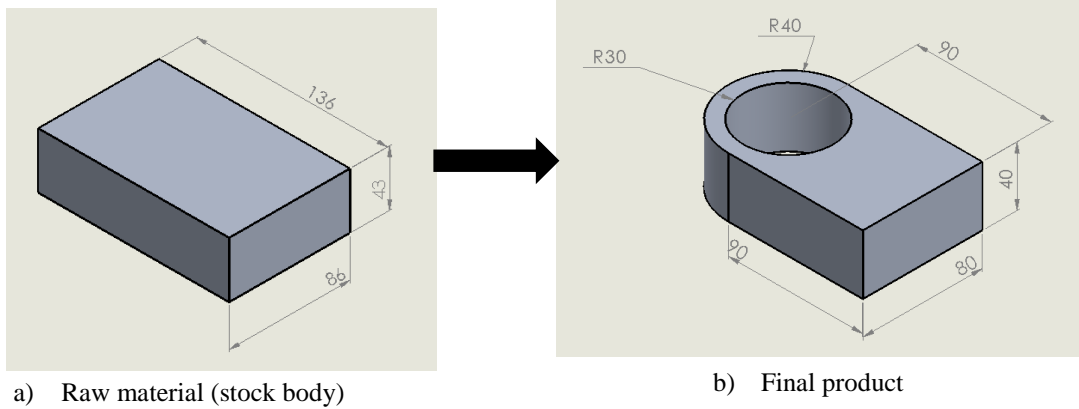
3D view of the raw material and final shape of the head rest gripper
